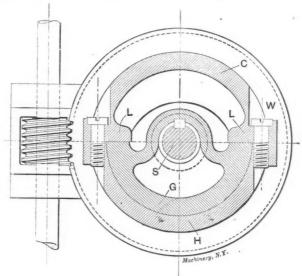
INDEXING DEVICE FOR CUTTER SPINDLE.
